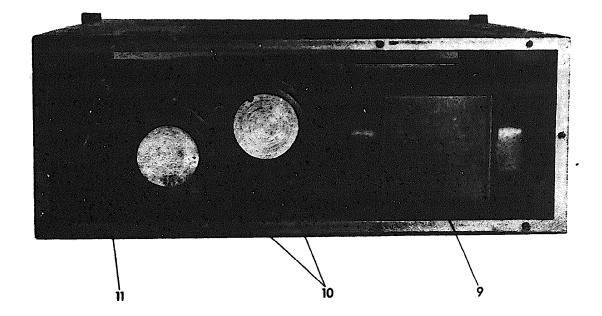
POWER SUPPLY ASSEMBLY, PP-6650/U (Sheet 2)
